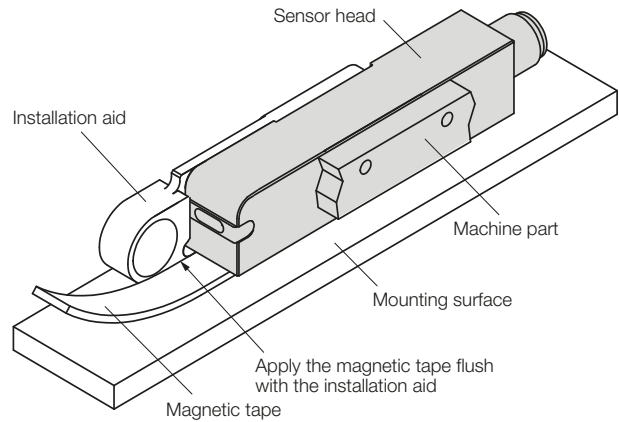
Fastening installation aid BAM TO-ML-006-S1G (order code BAM0256) (left- or right-sided fastening is possible, figure shows right-sided fastening)
